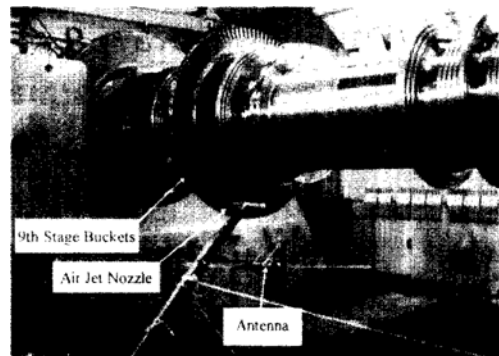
Bucket-rotor assembly installed in balancing bunker.
